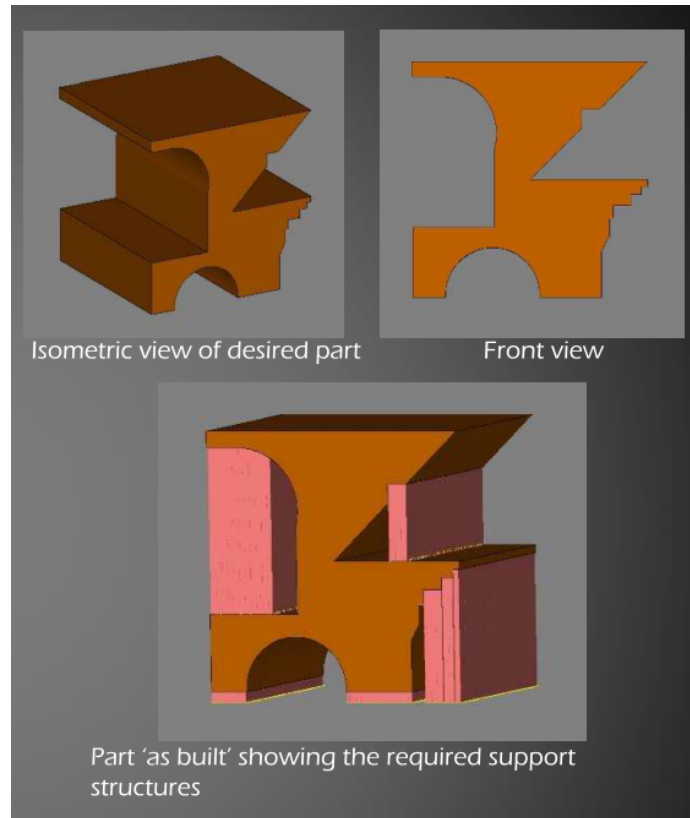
Isometric view (top left), front view (top right), and part “as built” showing the required support structures [6]
